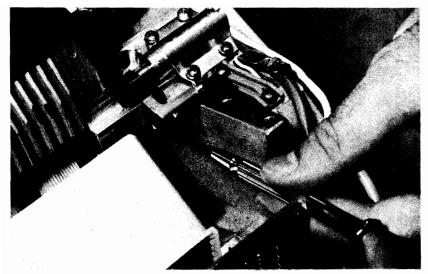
Position Transducer Adjustment (Shown with Ribbon Motor Assembly removed)
